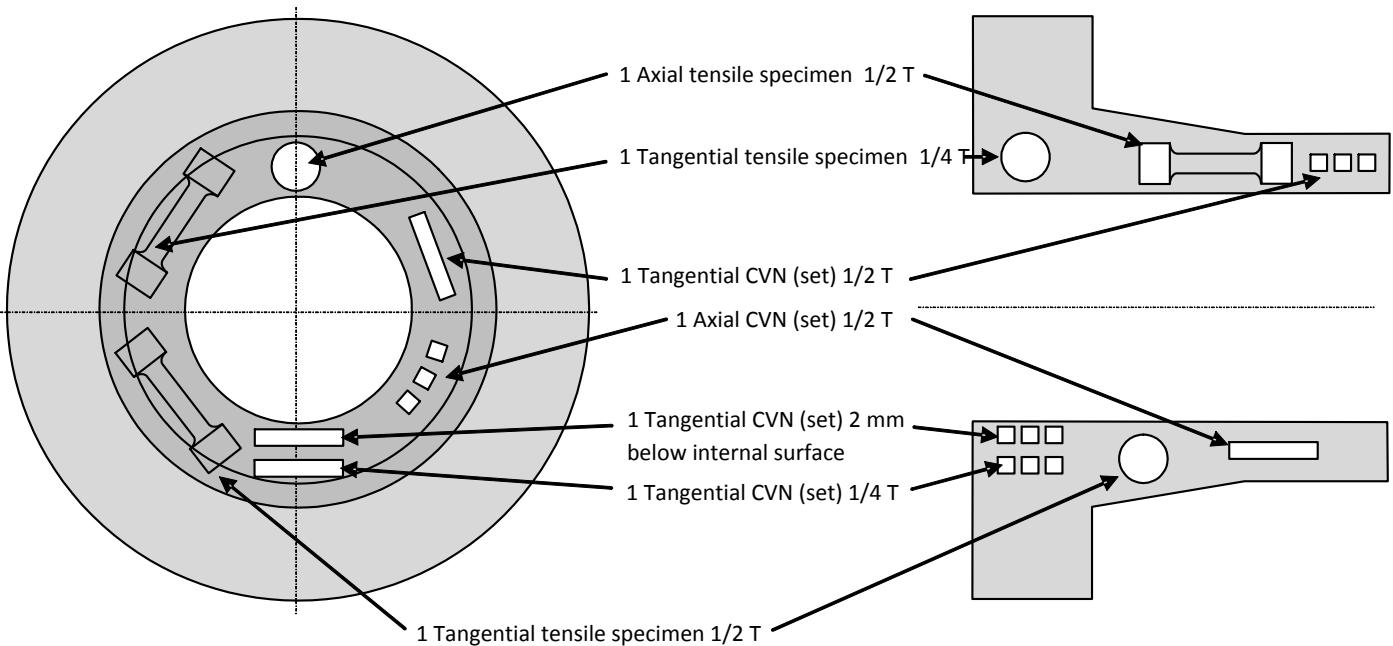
Location of tensile and CVN specimens, exemplified on a flange with maximum section thickness \geq 50 mm
